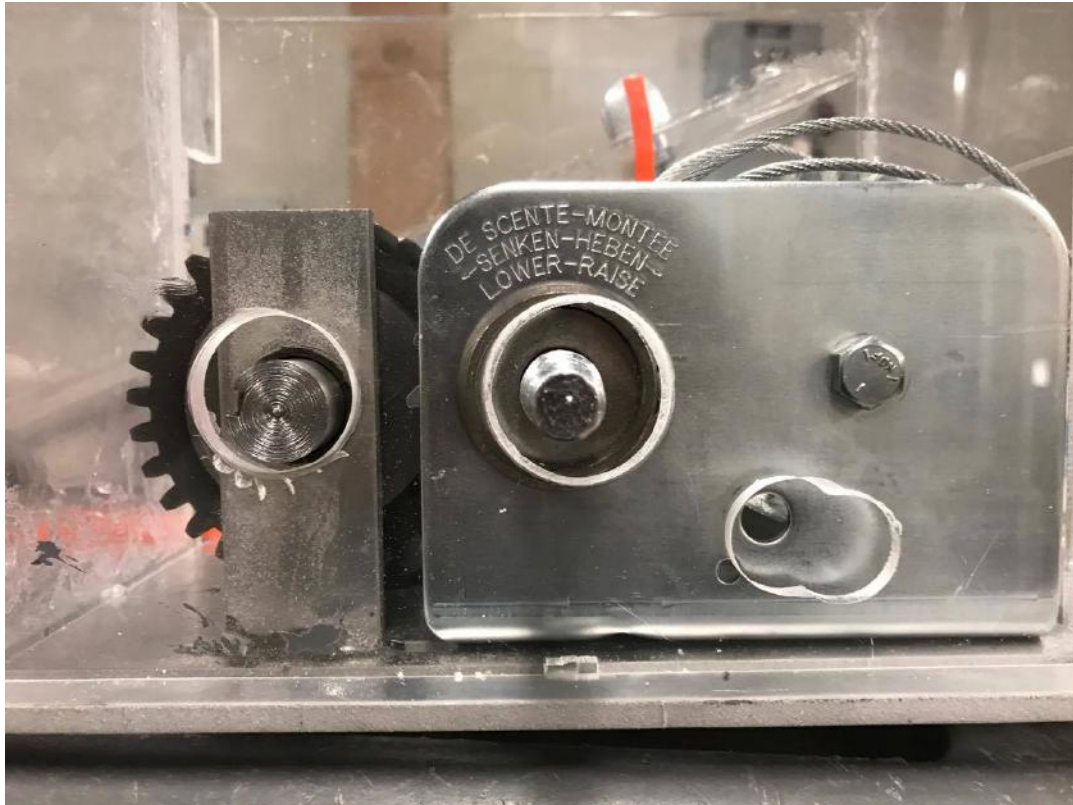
Outer acrylic housing wall. From left to right the holes are as follows: shaft hole (left), lever hole (middle), and lock-nut hole (right).
